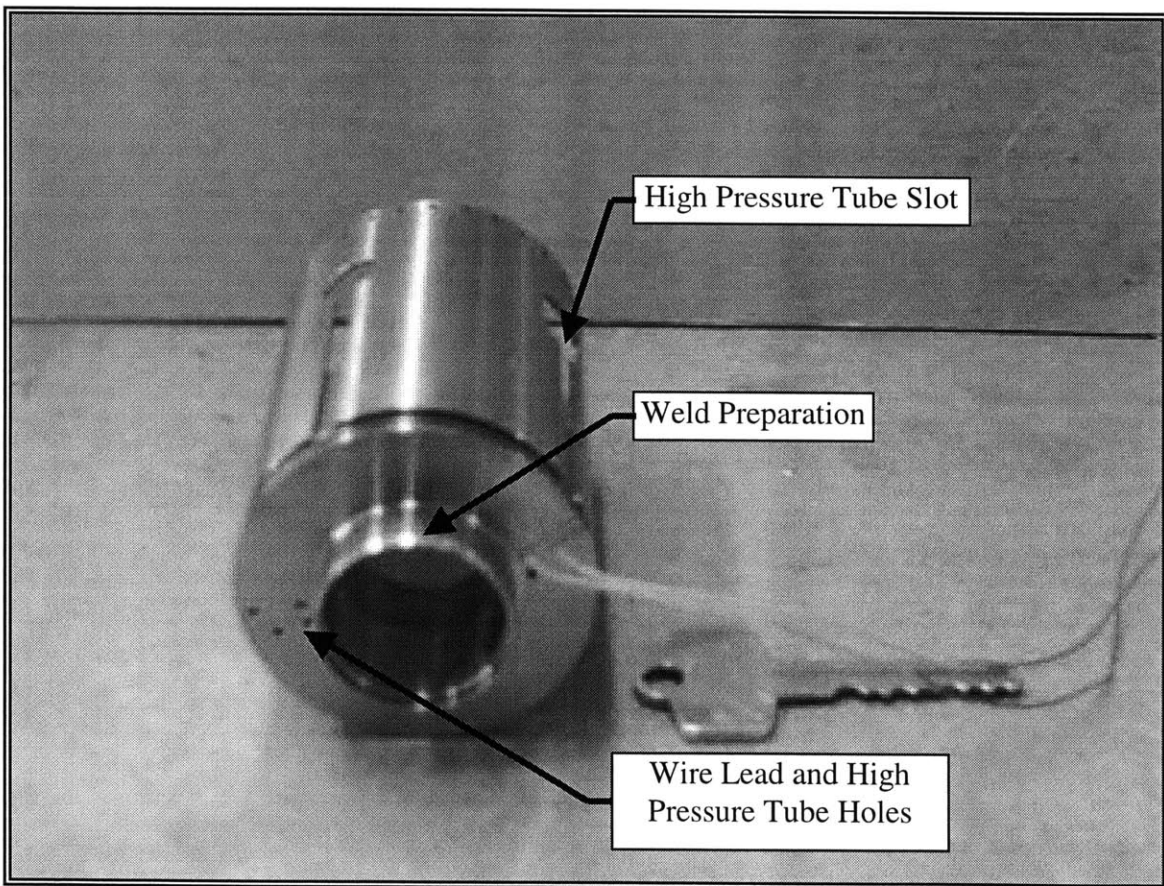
This top view of the housing wall shows the expander weld preparation in addition to the slots for the small, high-pressure gas tubes leading up to the flange ports
